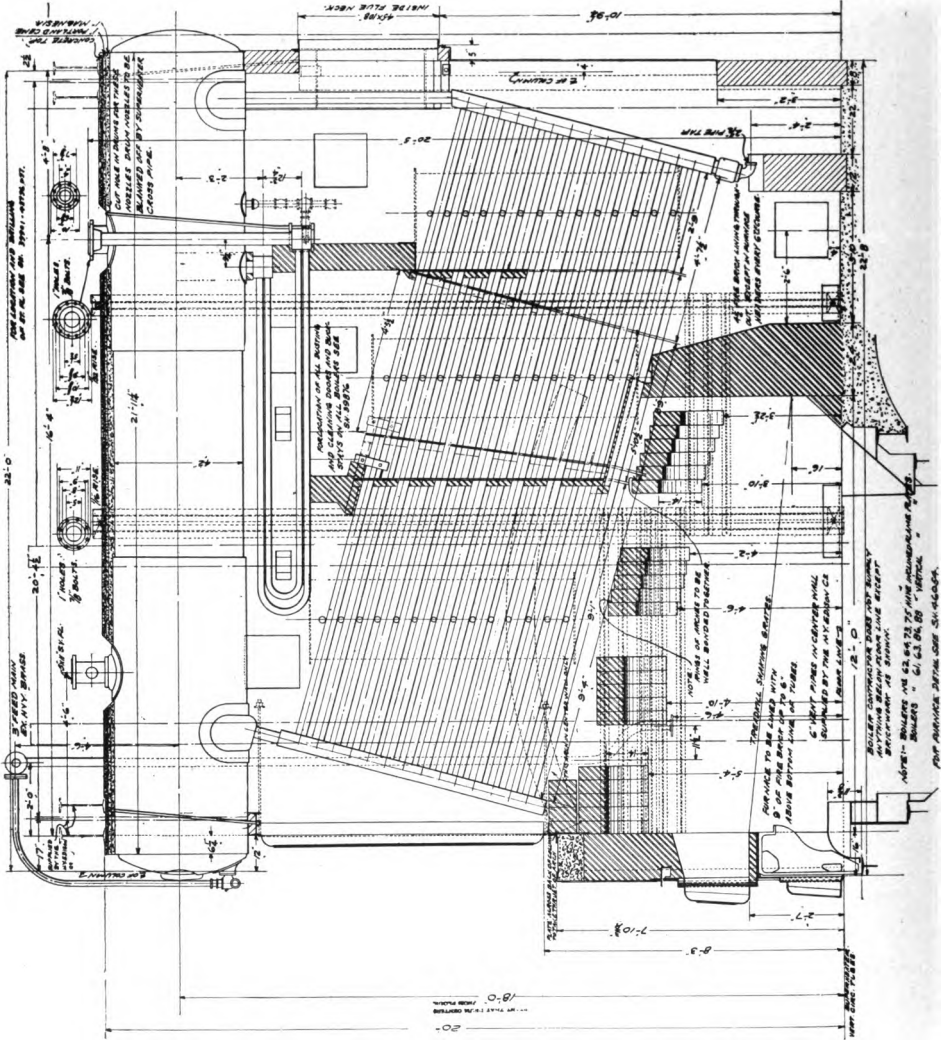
Section of Babcock & Wilcox Boiler, Waterside No. 2.
